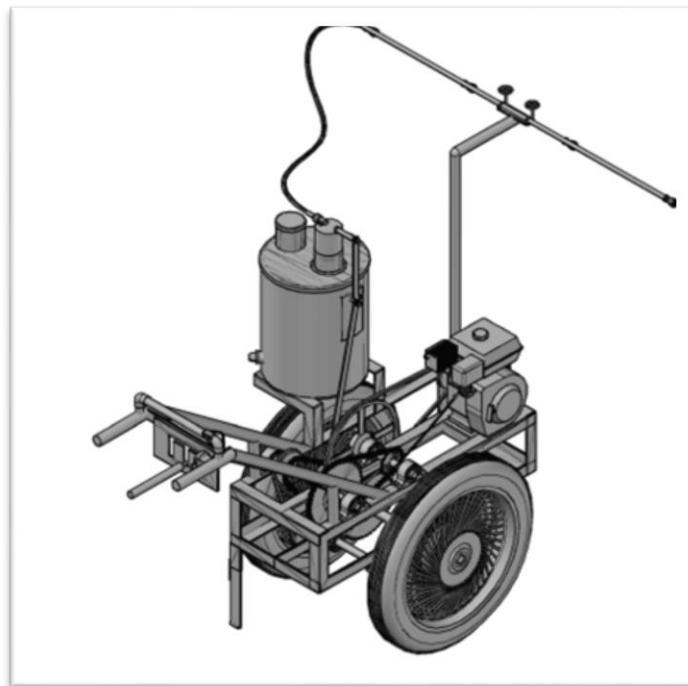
Auto CAD Drawing of the Multi-Nozzles Engine Powered Sprayer
